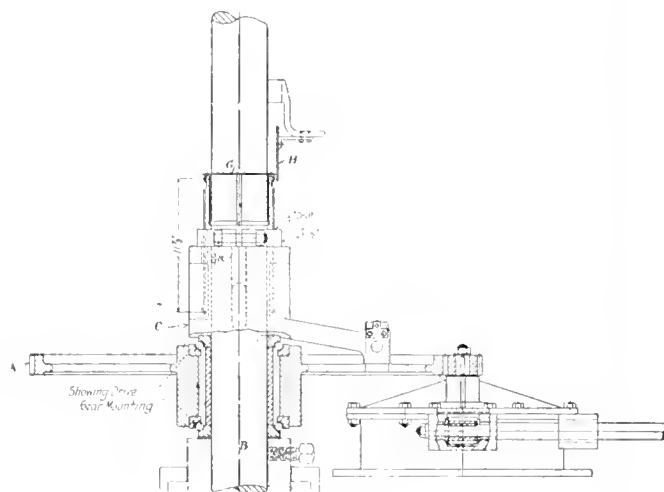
DETAILS OF DRIVE-GEAR MOUNTING OF TESTING MACHINE SHOWN IN FIG. 2
